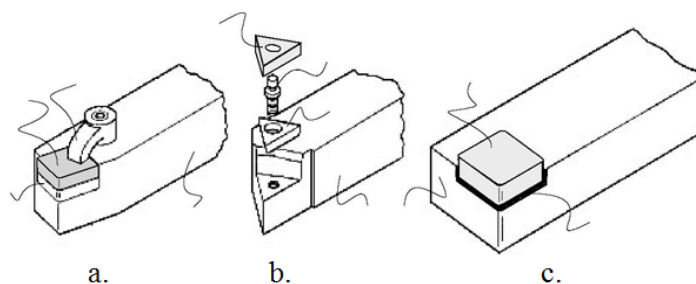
Methods of attaching carbide inserts to tool holder:
